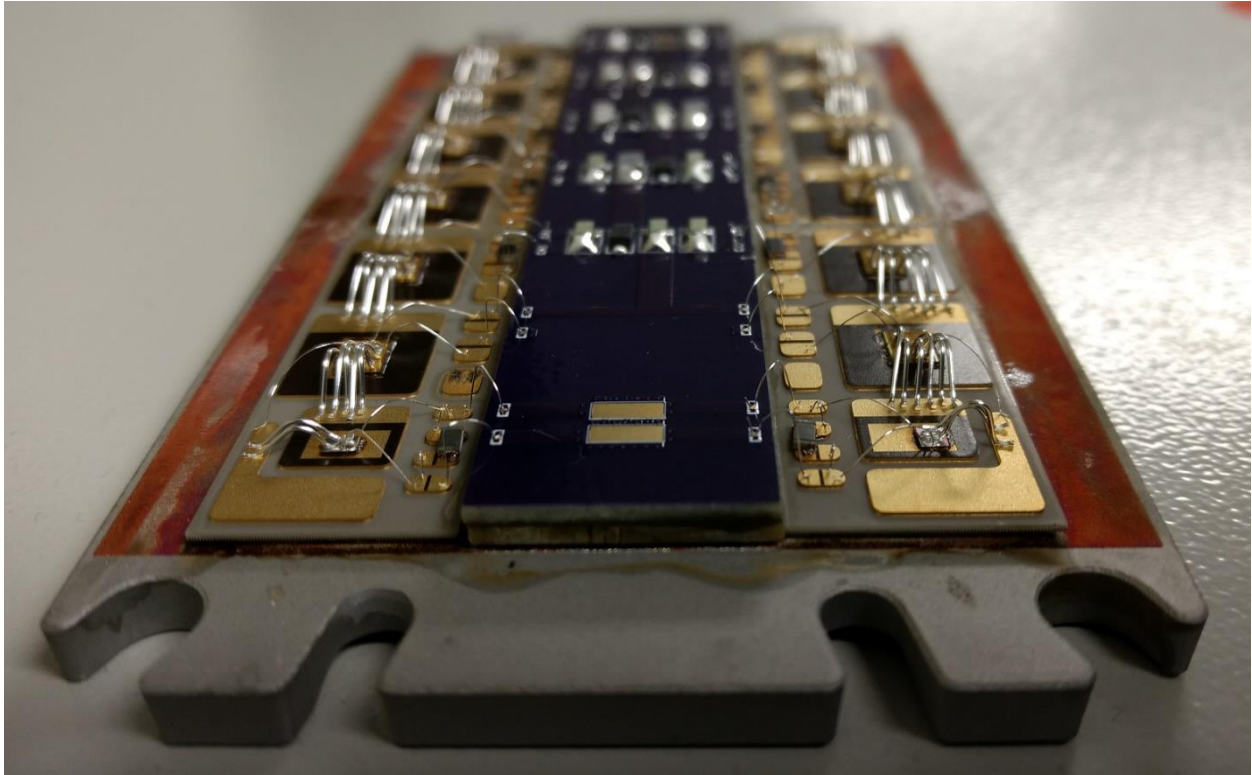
Side view of E3-packaged SCPM before busbar soldering, housing attachment and encapsulation
